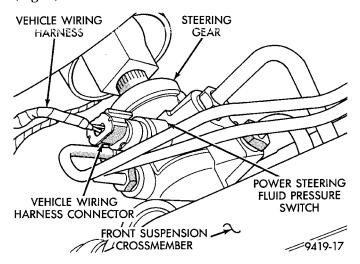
Power Steering Fluid Pressure Switch Electrical Connector
